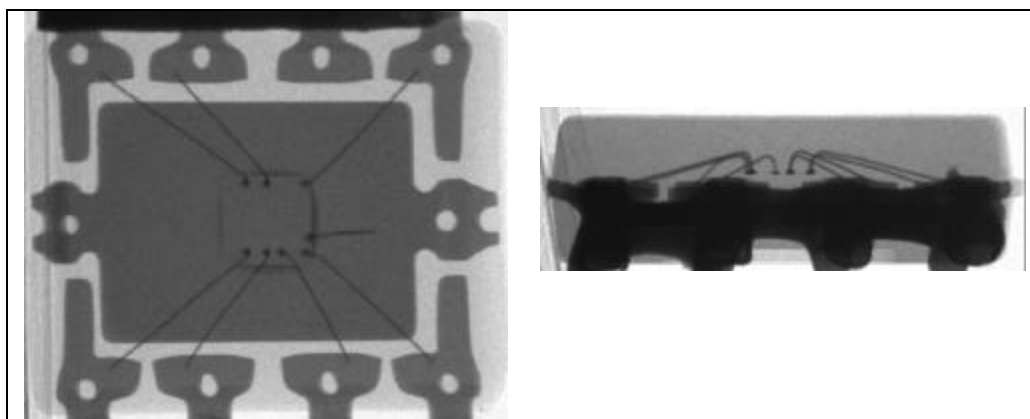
Typical top and side radiographic views of the part showing adequate lead frame design, wire dressing and layout.
